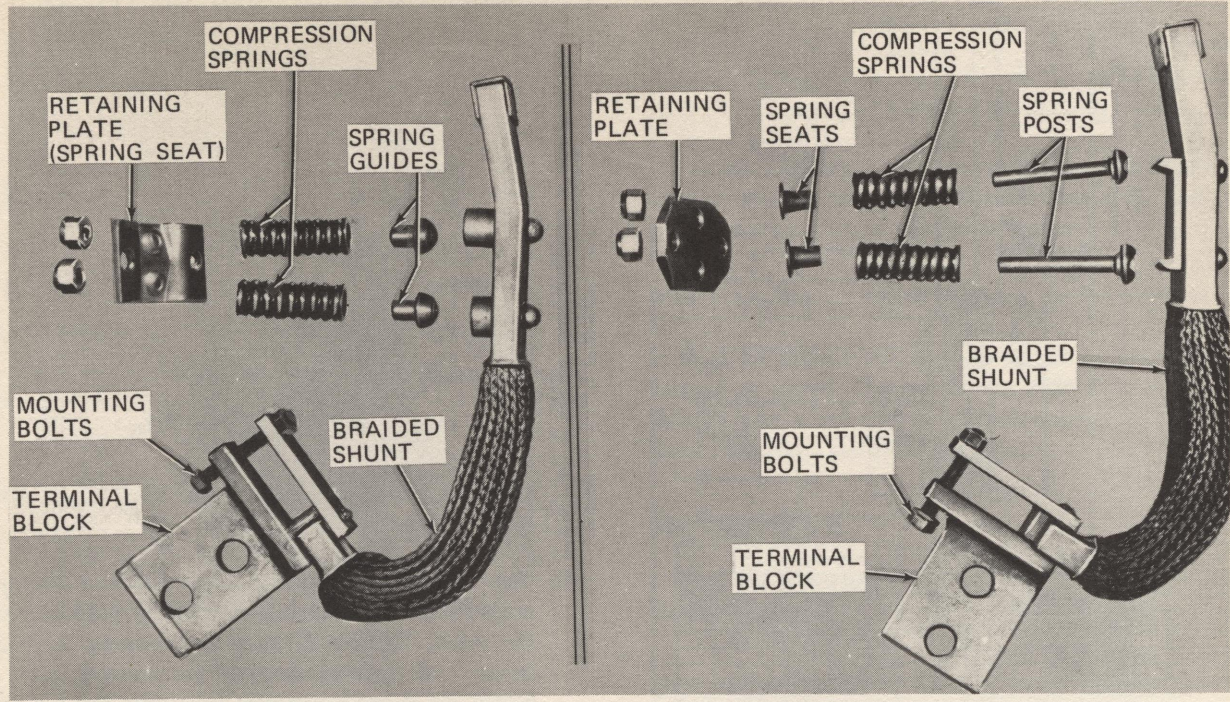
EXPLODED VIEW OF SELF-ALIGNING AND STANDARD FINGER ASSEMBLIES.
